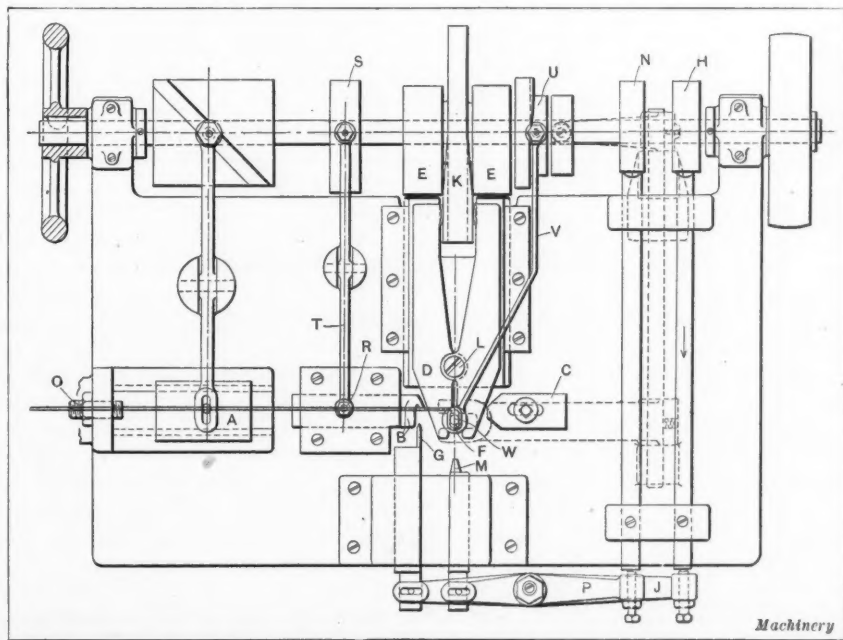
General Arrangement of an Automatic Chain Making Machine
